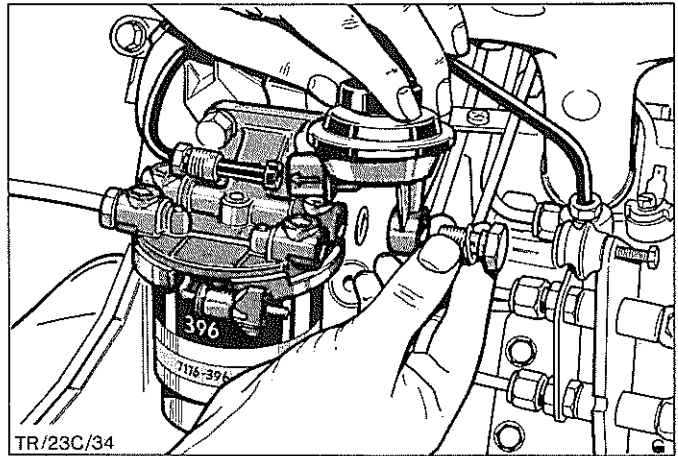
Priming fuel filter using primer pump assembly (CAV fuel system only).
